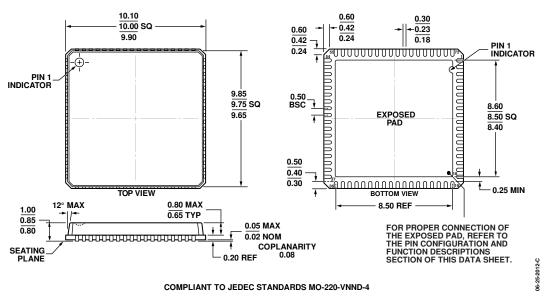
72-Lead Lead Frame Chip Scale Package, Exposed Pad [LFCSP_VQ]
